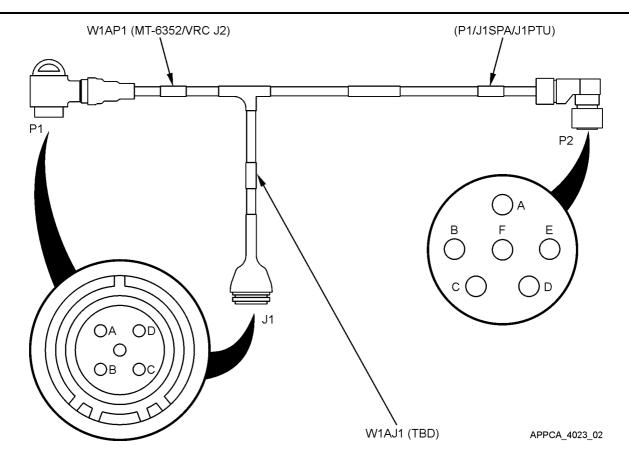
P/N 881278 W1A Cable Assembly (PALADIN)
